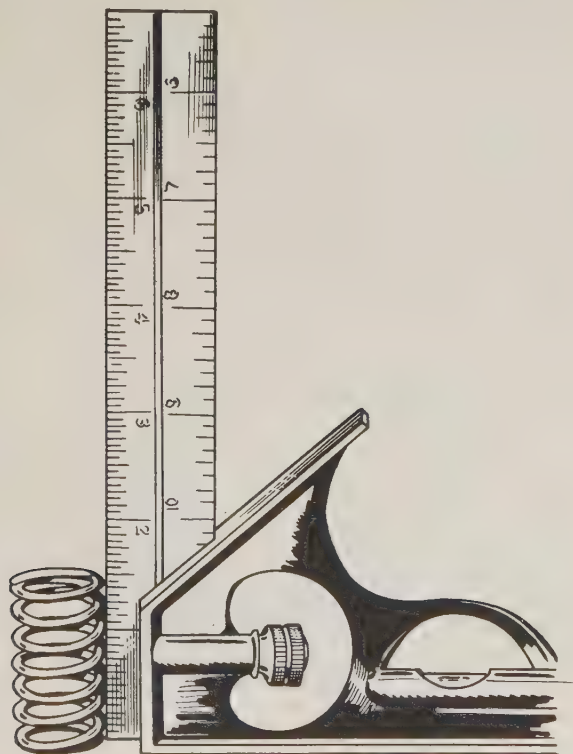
Checking valve-spring squareness. (Onan Corporation)
